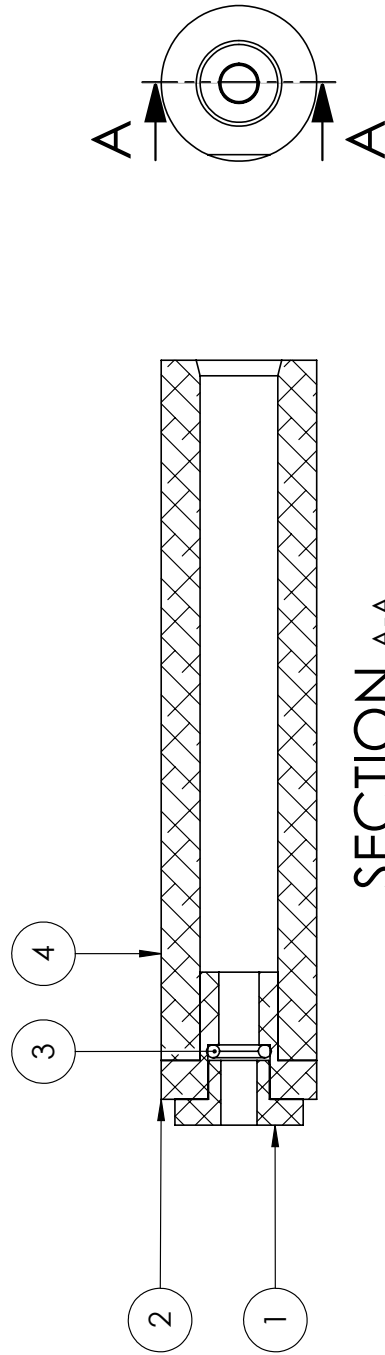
SolidWorks drawing of the assembly of part 1, containing the piston, rod and plate.
